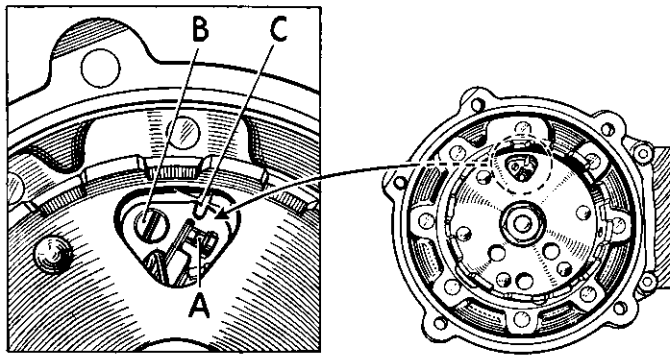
Adjusting the Contact Breaker Points (Lucas).
